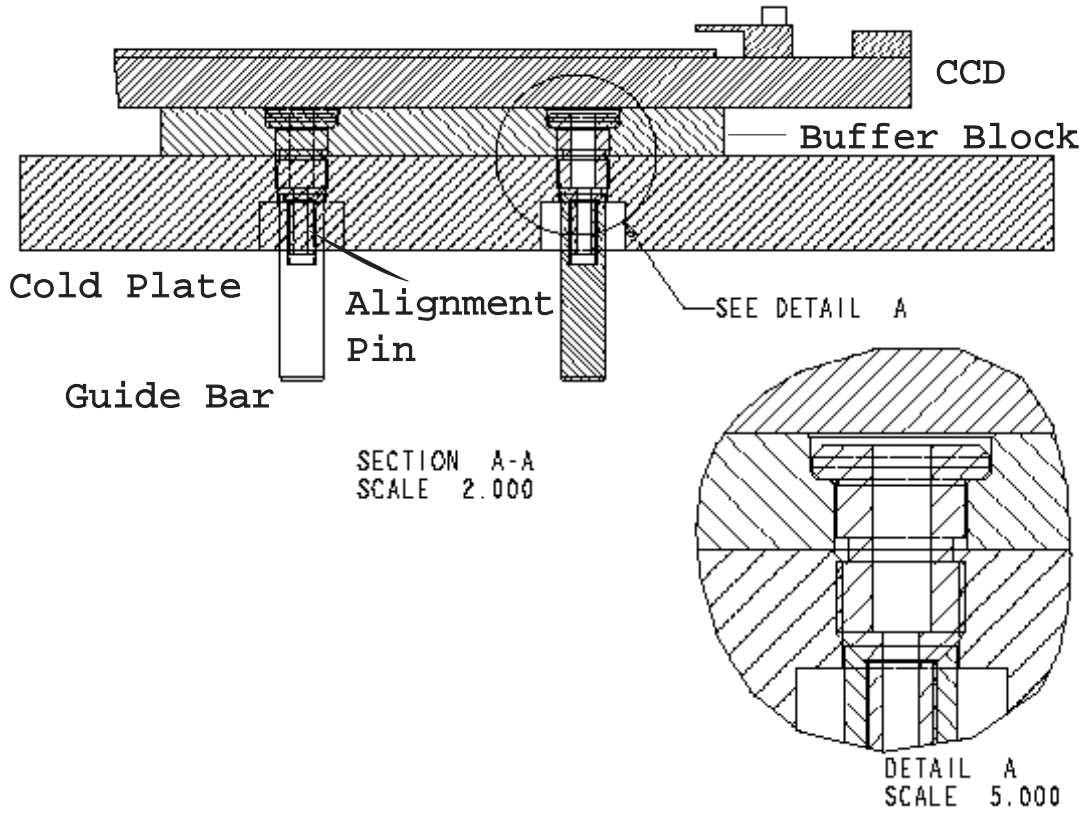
Cross sectional view of a CCD with a buffer block mounted on the cold plate
